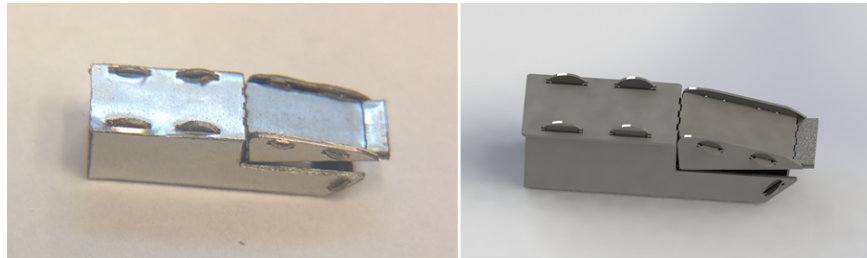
Completed grasper (left) with SolidWorks CAD model (right).
